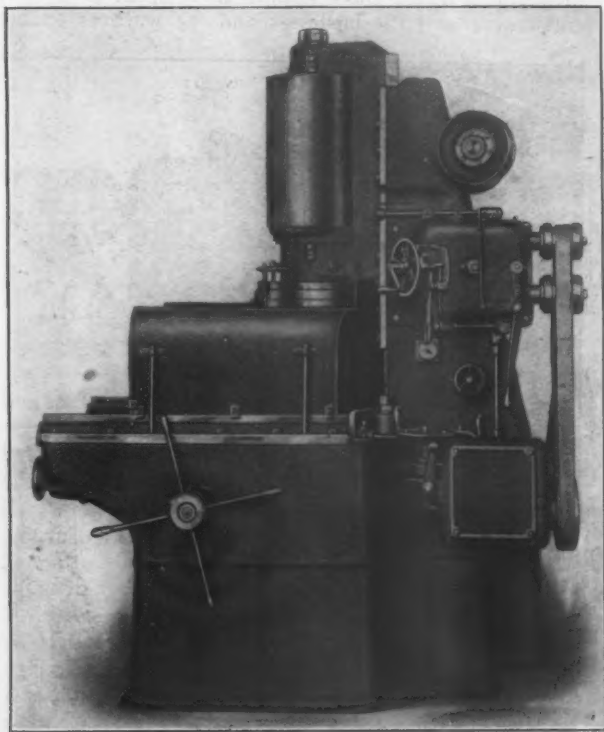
General View of the Vertical Spindle Surface Grinder Built by the Blanchard Machine Company, Cambridge, Mass.
